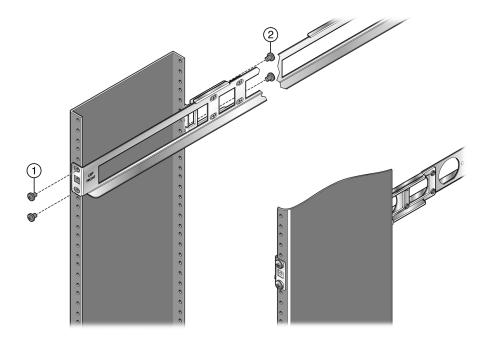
Positioning and Attaching the Rails to the 7-inch Posts
